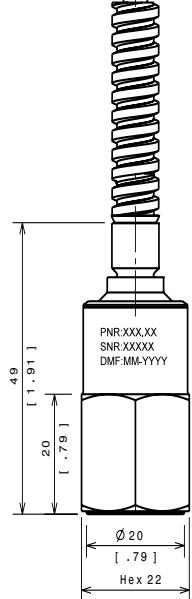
Outline drawing B=8 (cable with conduit protection)
